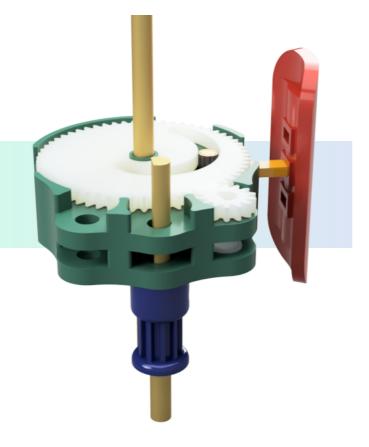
Two layers of the 3D CAD model showing the shape change mechanism.
